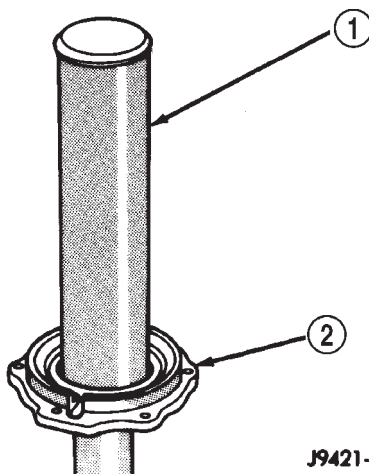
OIL SEAL IN FRONT BEARING RETAINER
